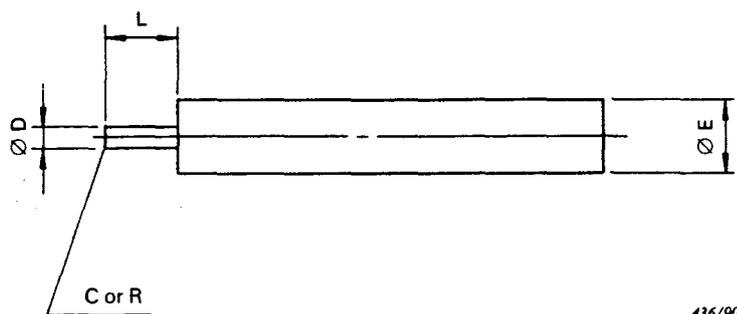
Pin gauge for an adaptor (dimensions given in Table 6)
